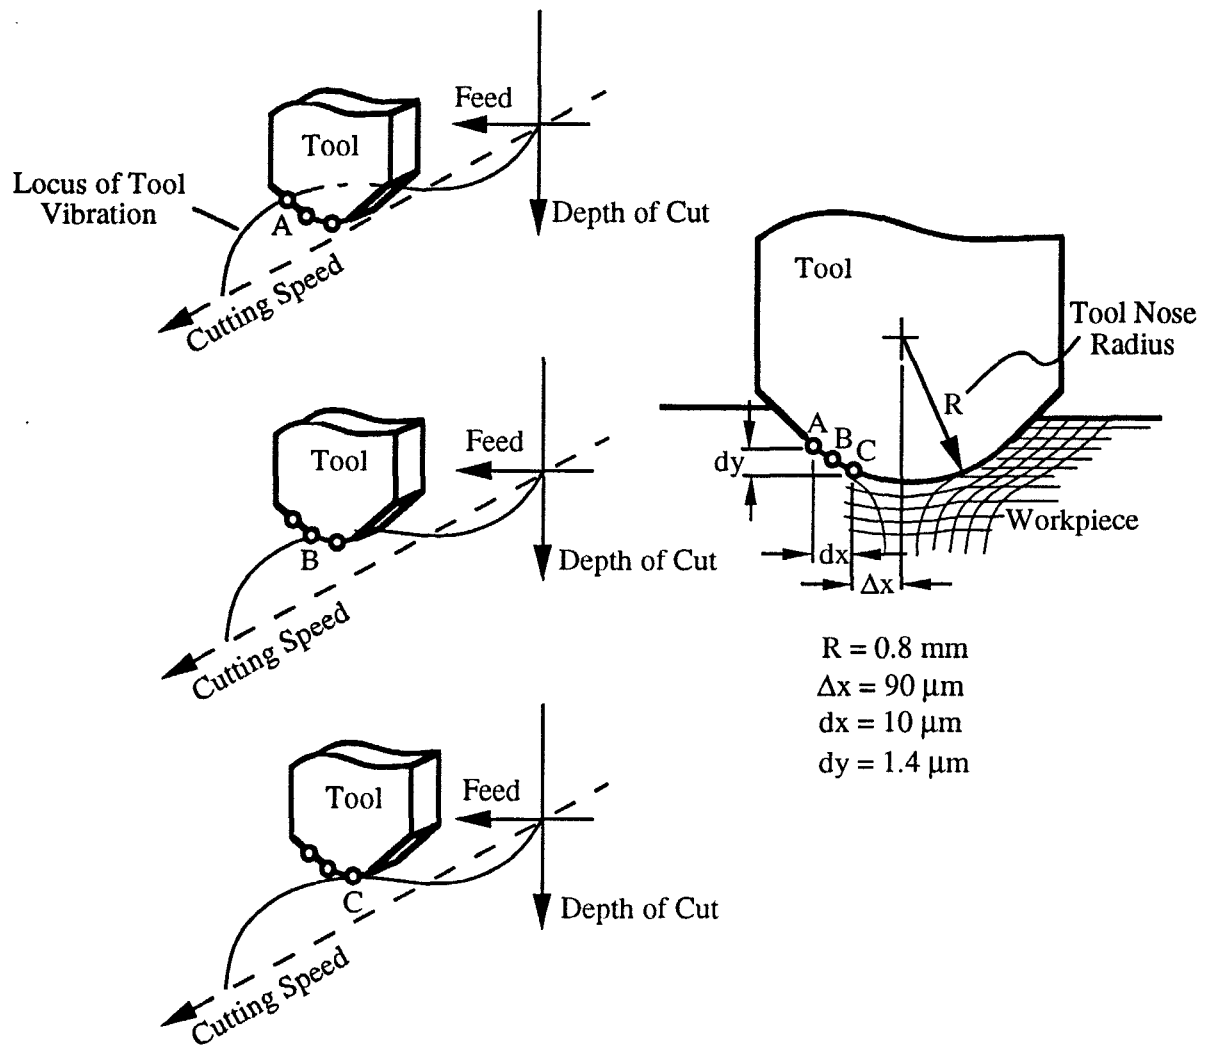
Intuitive View of Surface Texture Formed during Machining
